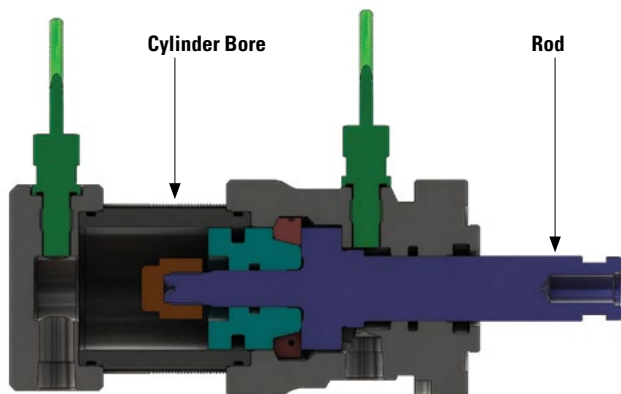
Slide Movement example using the Hydraulic Locking Core Pull Cylinder.
